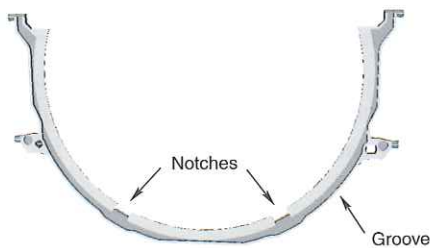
Component shape (back side) proposed in preliminary improvement plan
